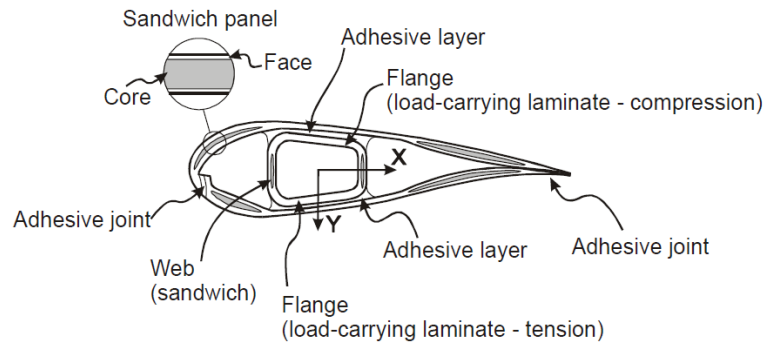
Girder box showing laminate, sandwich, adhesive bonds
